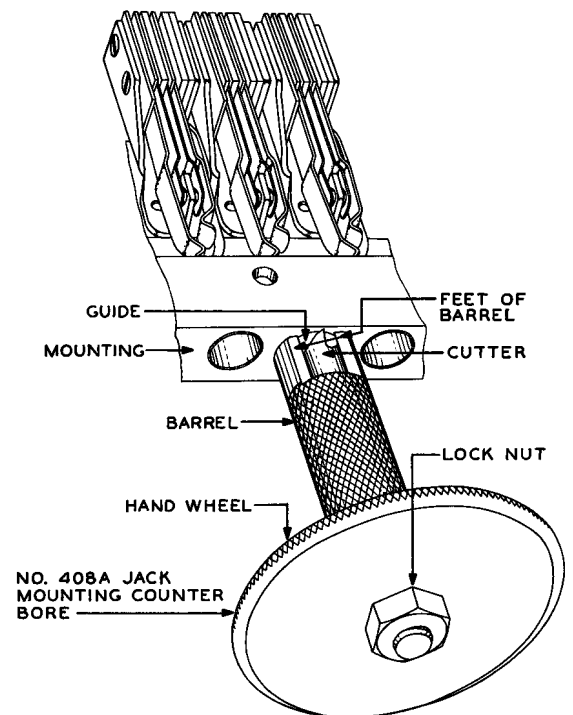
Method of Counterboring Mounting With 408A Jack Mounting Counterbore
